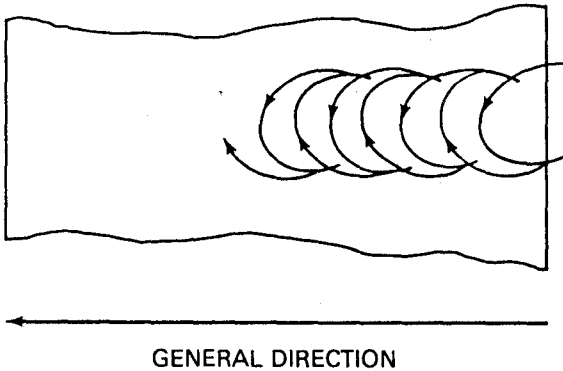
Typical Cutting Torch Manipulation for Cutting Cast Iron
